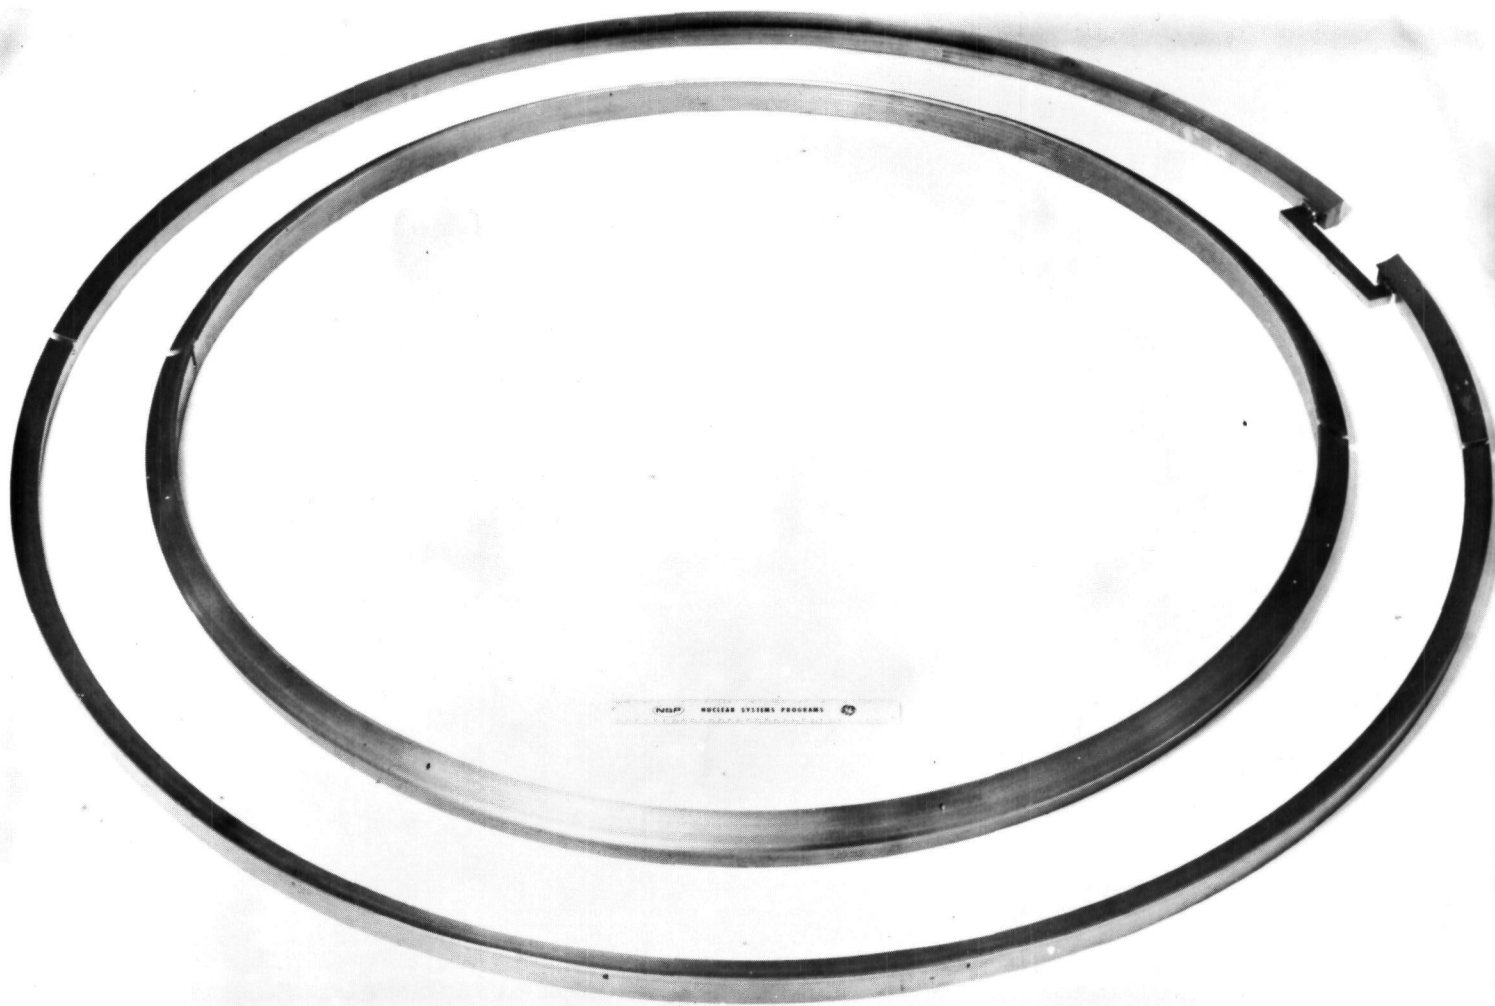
Shell Support Rings for Inlet and Outlet Manifolds. Temporary Bridge Shown Tack Welded at Nozzle Cutout Location on Inlet Ring. (P69-4-30)
